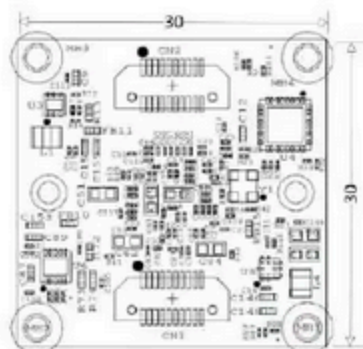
e-CAM315_CUMI900M_MOD_H02R1 – Bottom View Mechanical Dimensions
